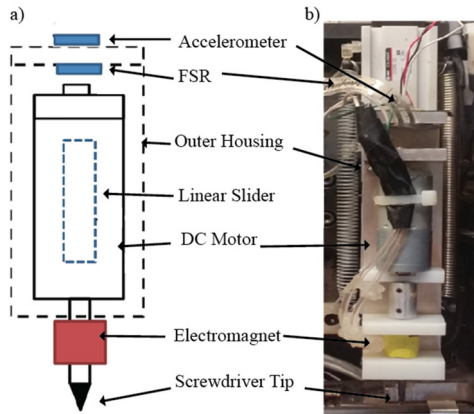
(a) Sketch of screwdriver. (b) Prototype of screwdriver. (Linear slider is hidden behind shell.)
